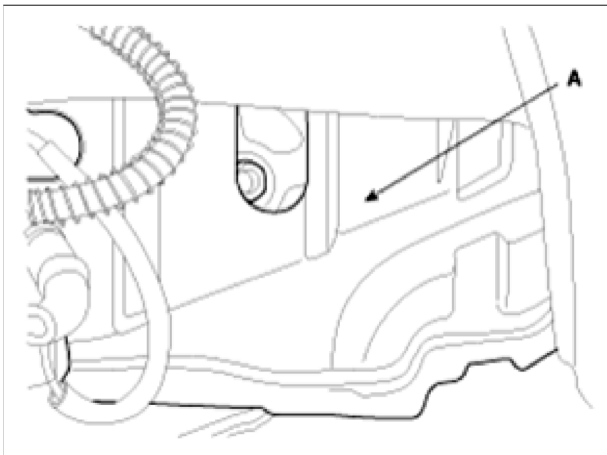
Identifying Cylinder Head Cover & Gasket
